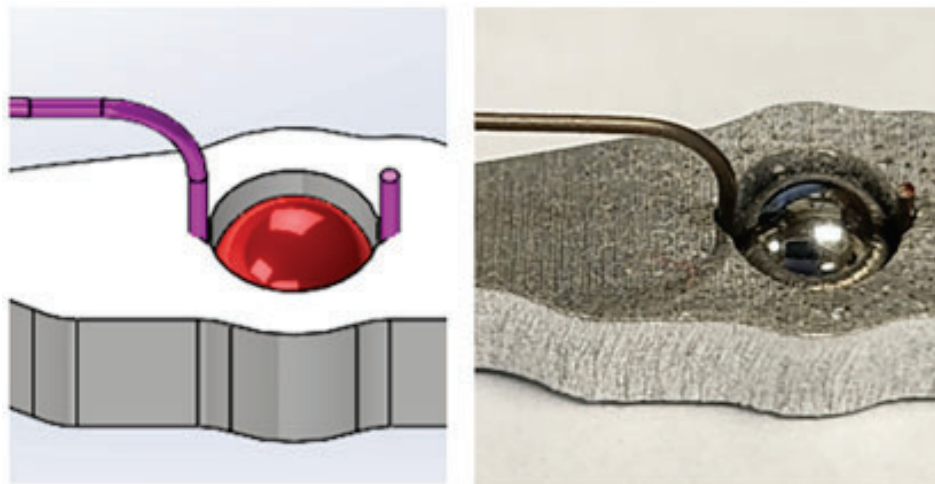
The model (left) and as built (right) ball plug press fit mounting used to mount the spring wires to the wire base. This mounting provides a rigid support for the deflecting spring wire.
